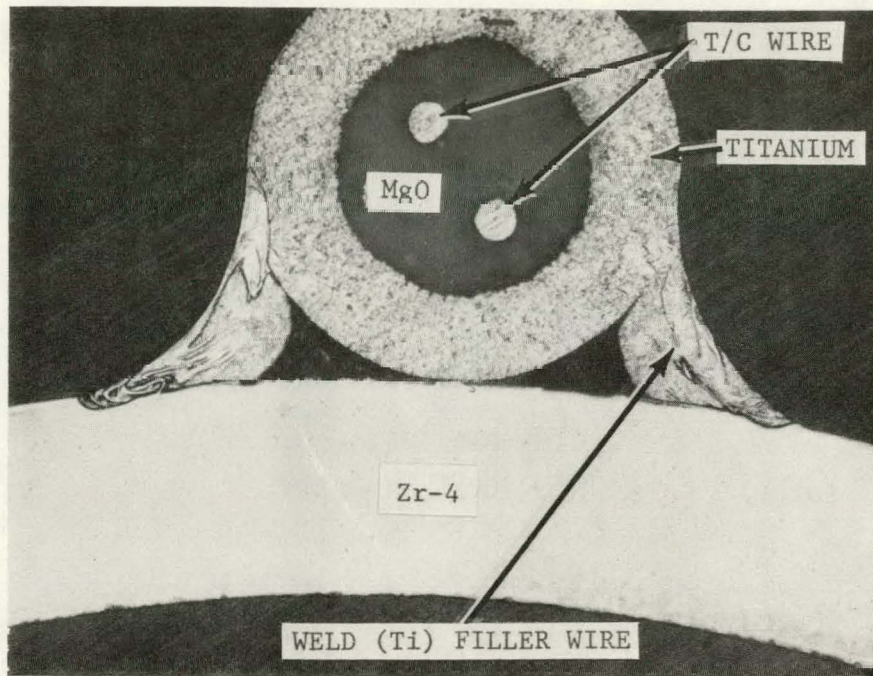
LOFT laser weld – insufficient mixing.
